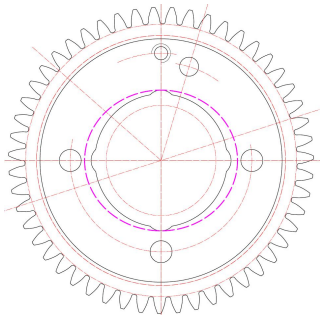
The schematic for large roundness of the inner hole of the bias gear workpiece
